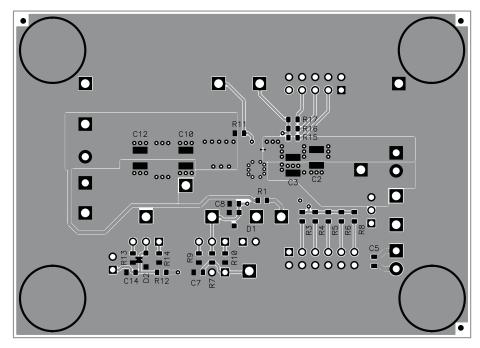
TPS84620EVM-692 Bottom-Side Layer and Assembly
